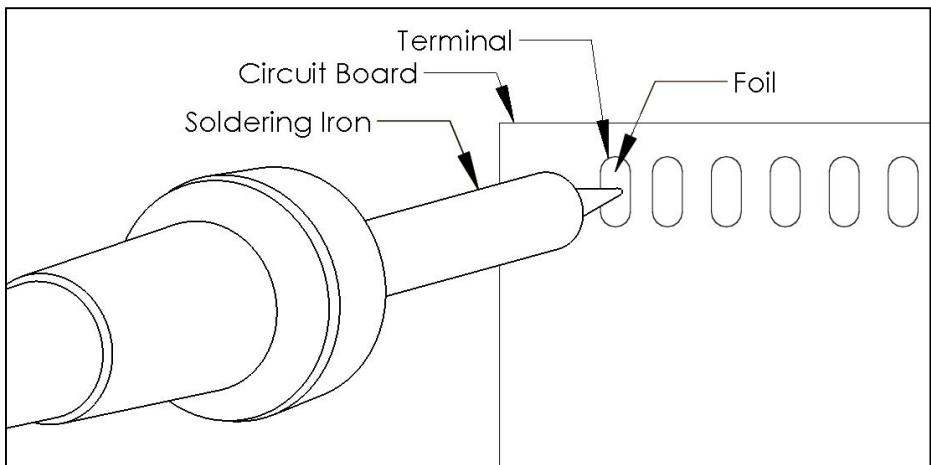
Heating the Circuit Board Foil with Soldering Iron
